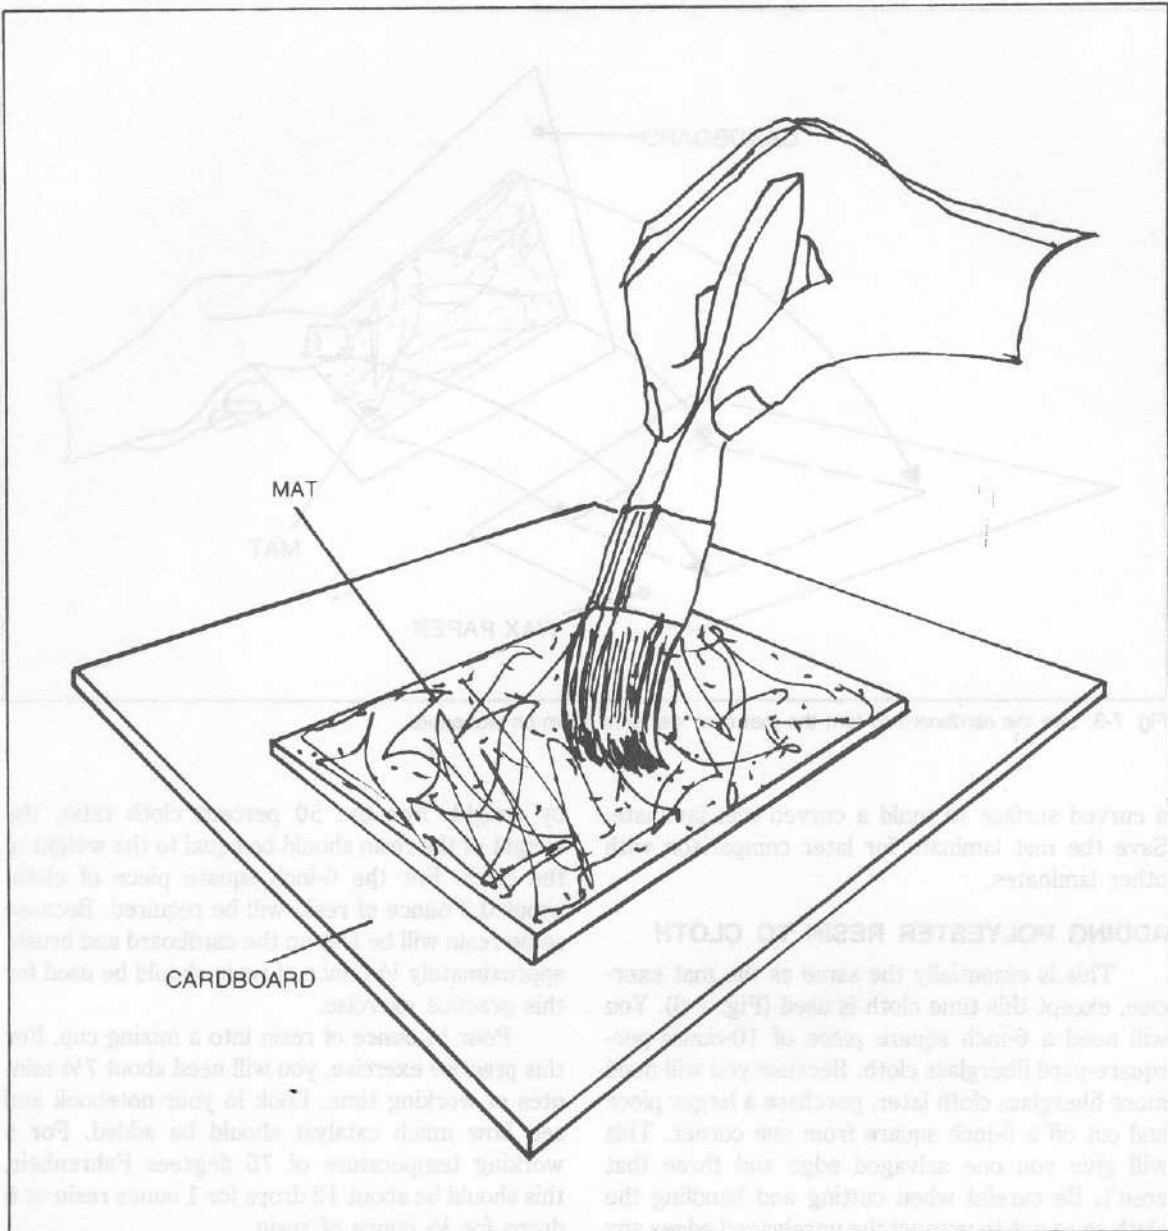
Using a brush, apply resin to one side of the mat.
